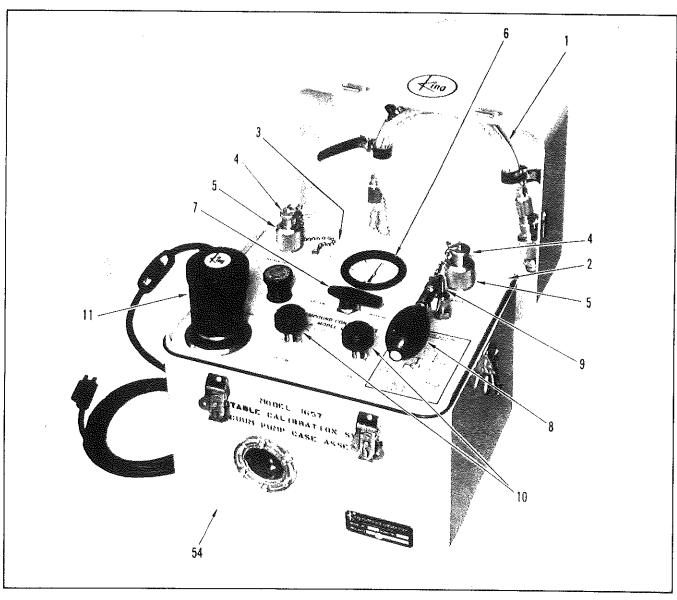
Vacuum Pump Case Assembly, Part No. 3657-51-1 (Sheet 1 of 2)
